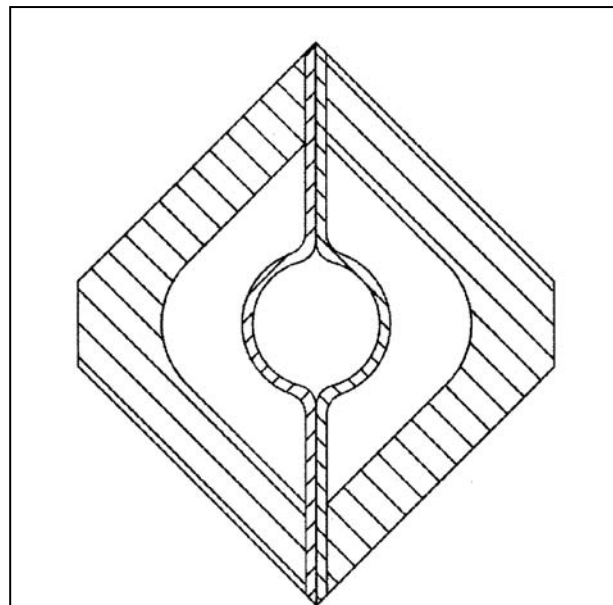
Cross-sectional view of a type 25/26/35/36/65/66/100 sensor profile for insertion of a resistance thermocouple
